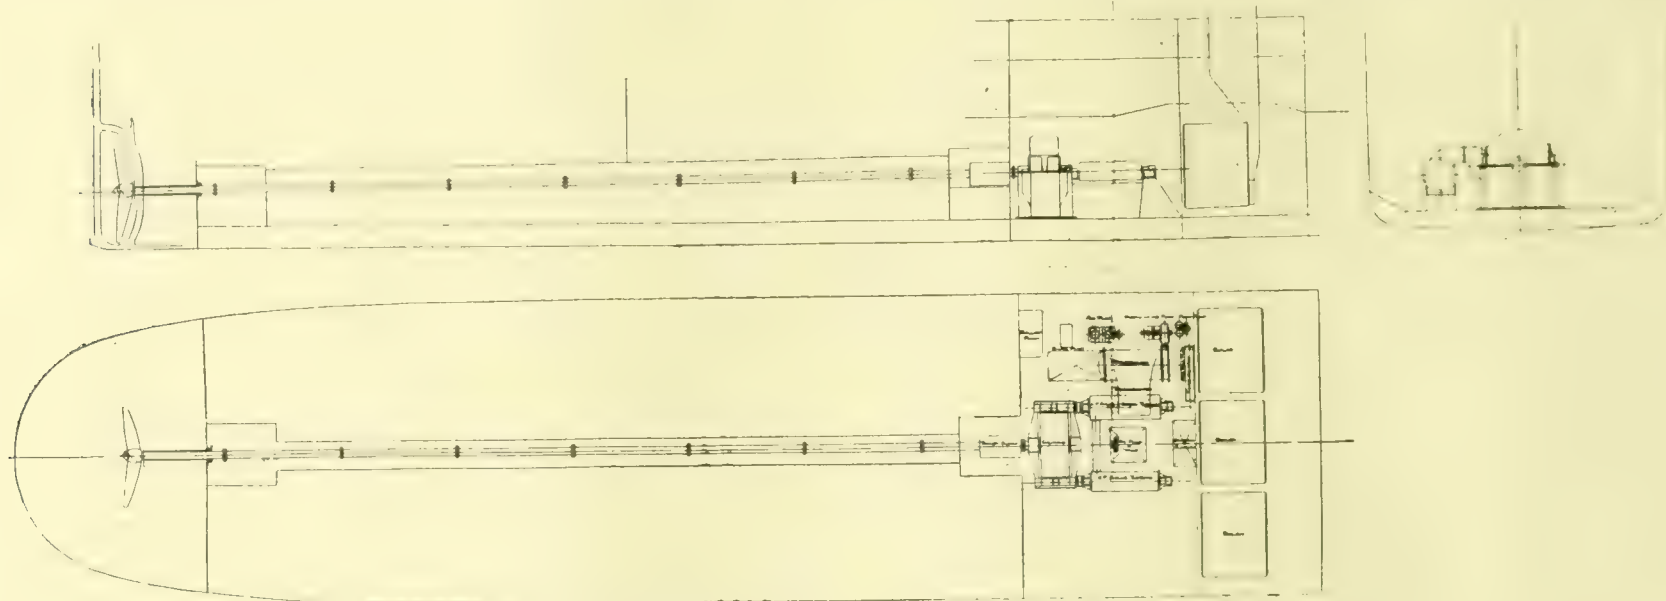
SINGLE SCREW CARGO STEAMER.
